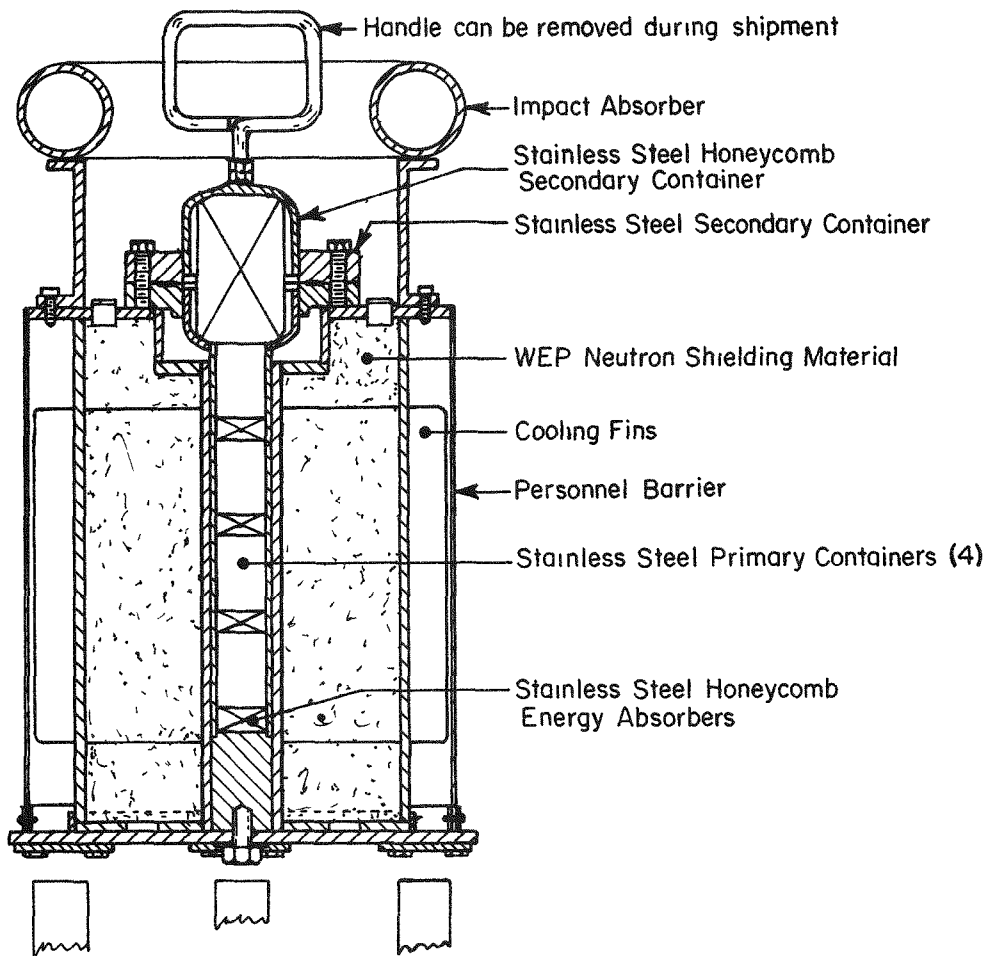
Post-Impact Sphere Assembly (PISA) Shipping Cask Assembly
